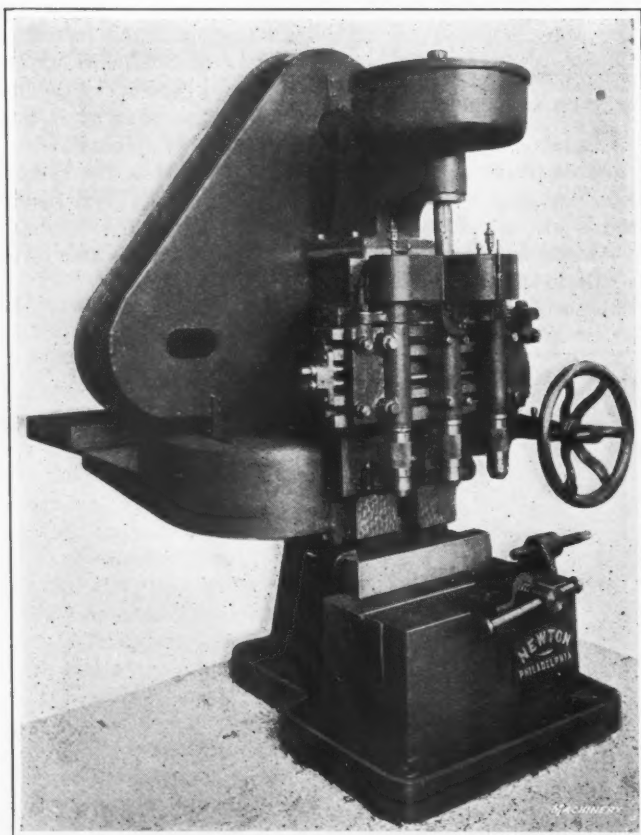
Three-spindle Rail Drilling Machine built by the Newton Machine Tool Works
